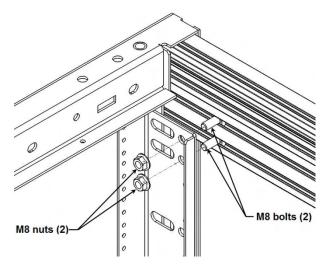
Equipment mounting rail for 600 mm wide cabinet
